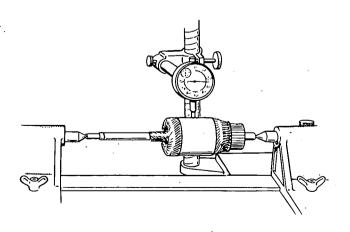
CHECKING ARMATURE SHAFT RUNOUT
